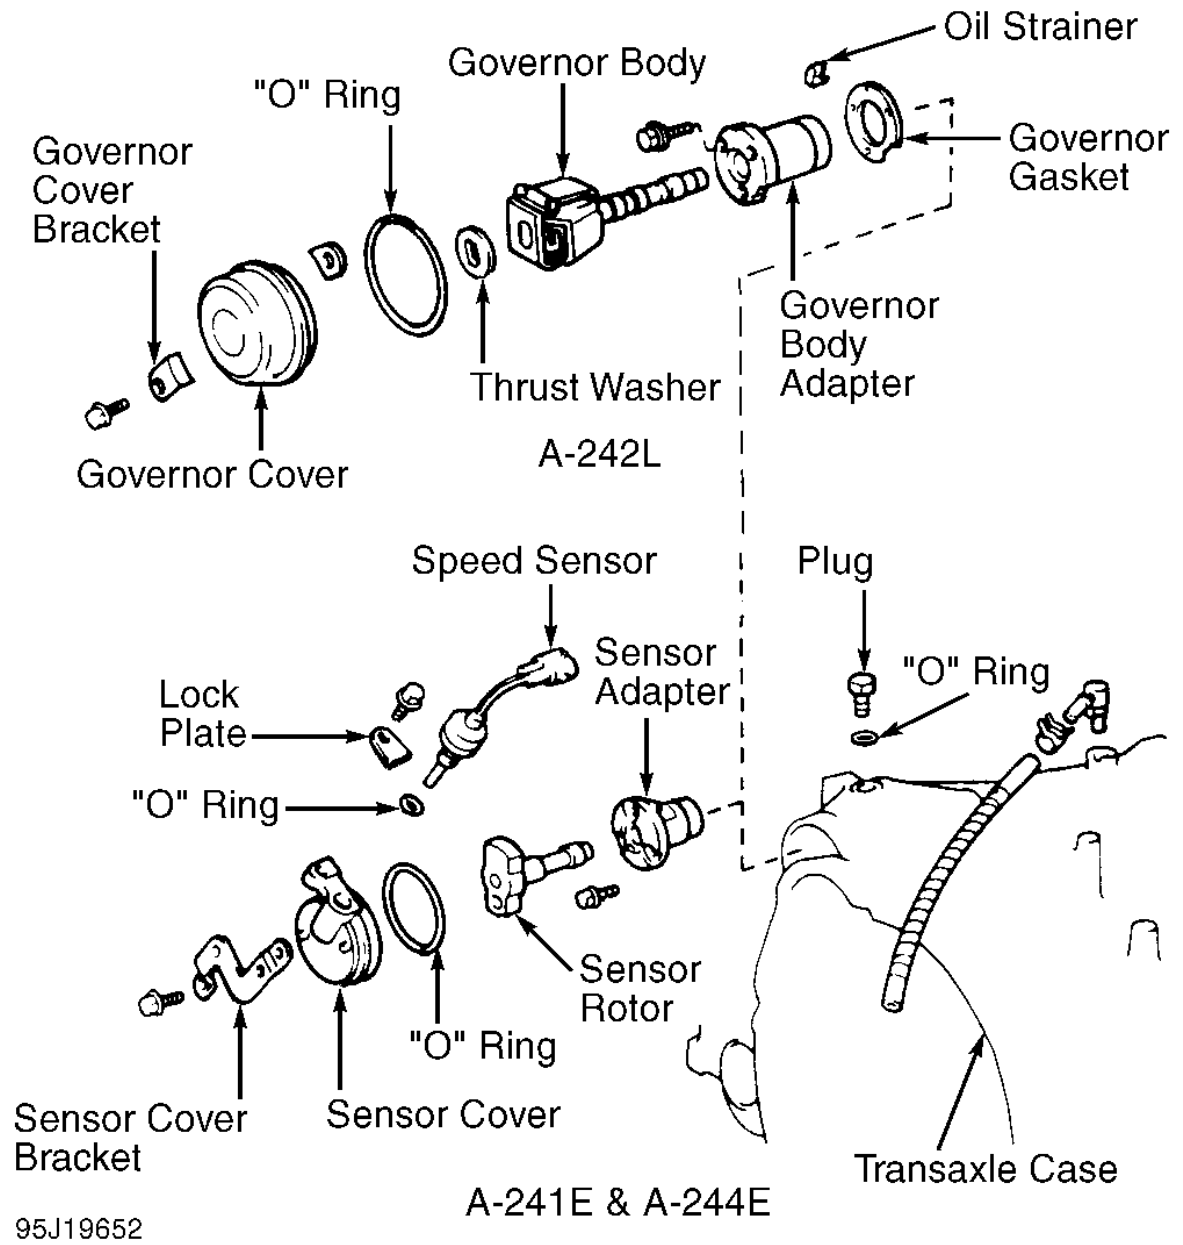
Exploded View Of Governor/Speed Sensor Assemblies
